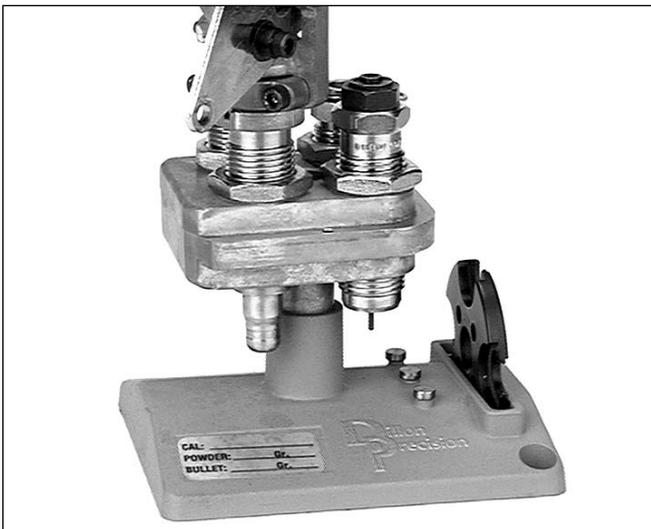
A complete, removable toolhead with all of the dies adjusted. Toolhead stand is optional.
